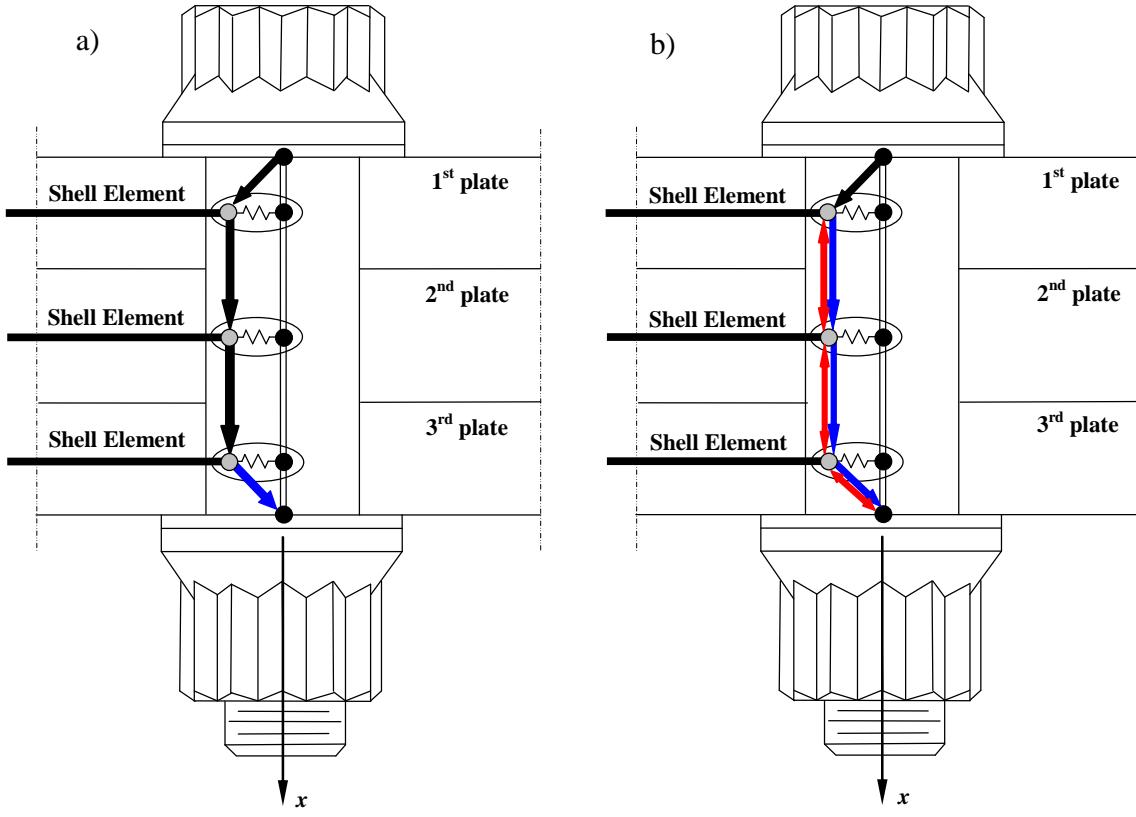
Model of a Fastener Joint Connecting Three Plates Modeled by Shell Elements:
